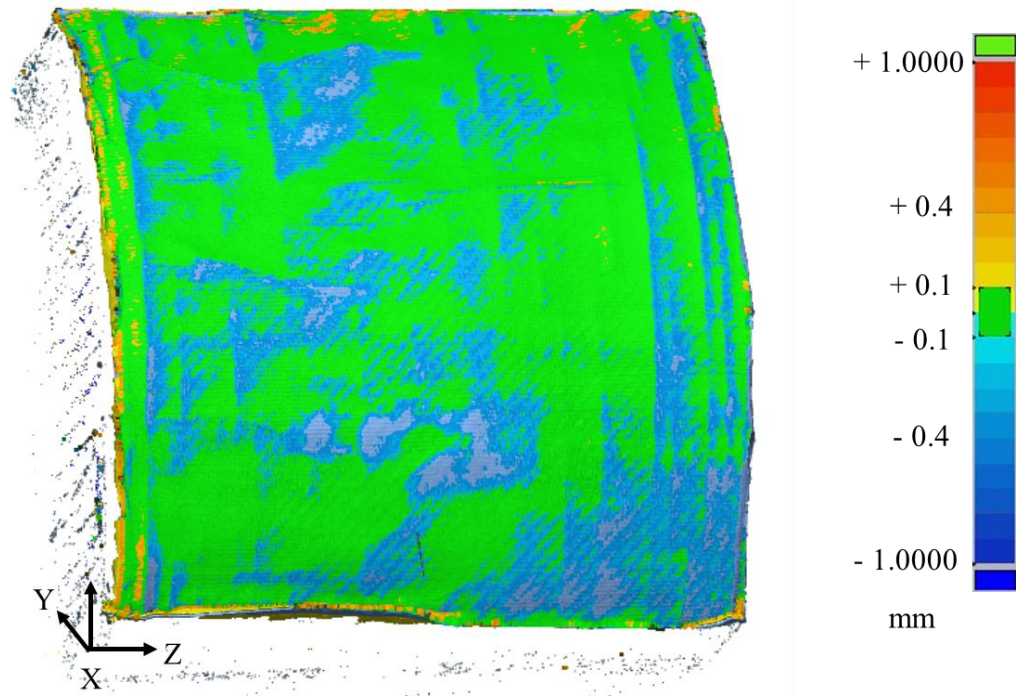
Degradation analysis of CF-BMI mold surface after fabrication of 7 hand lay-up parts
